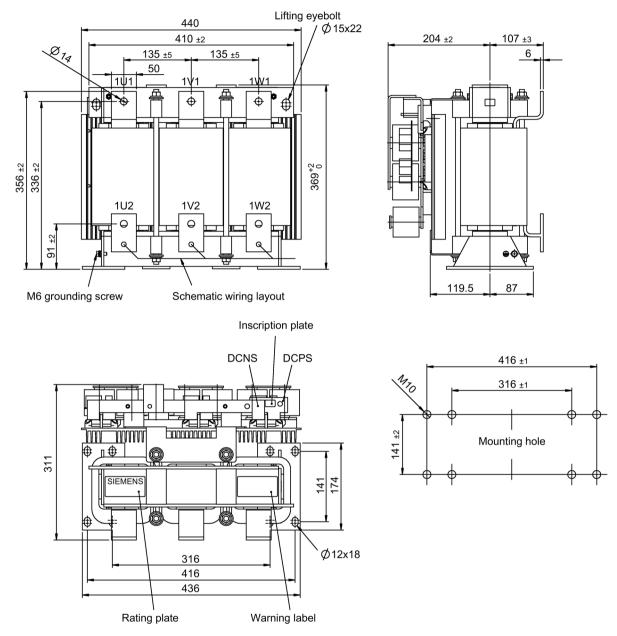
Dimension drawing for dV/dt filter compact plus voltage peak limiter, type 3
